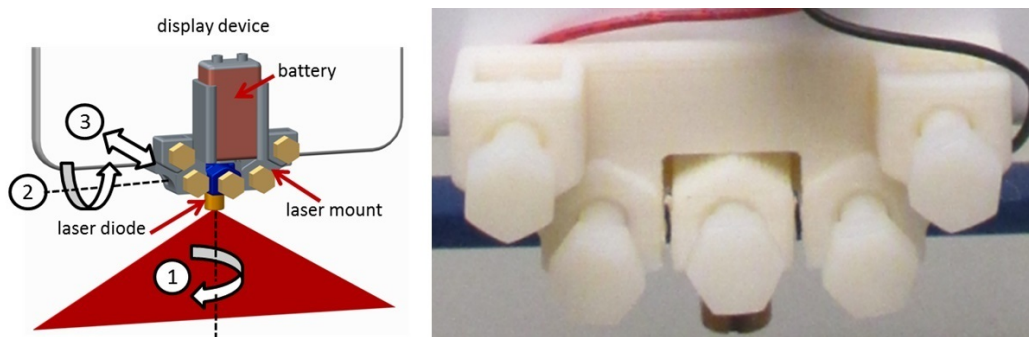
Laser mount to support laser diode with three degrees of freedom attached upon the viewbox: Left) Design. Right) Prototype developed.
